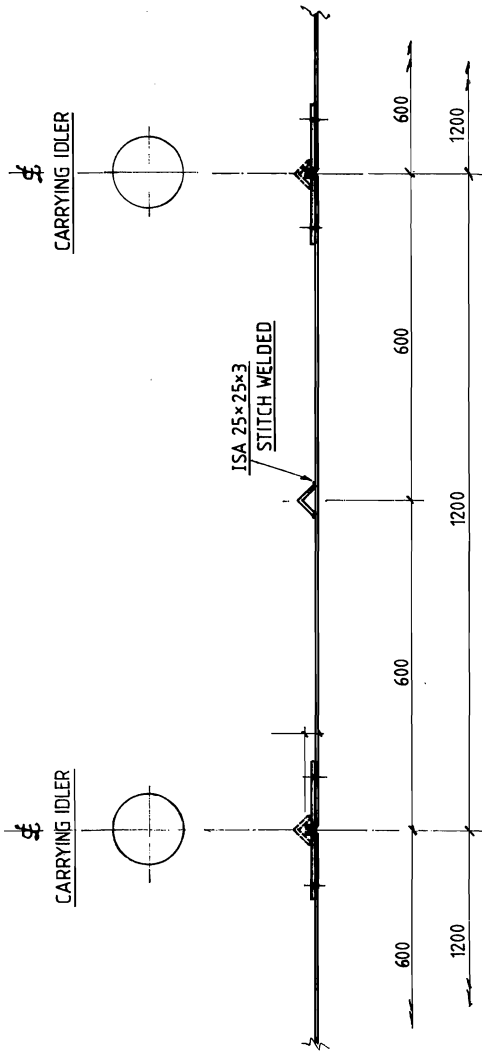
CONVENTIONAL DECKING PLATE BY WELDING AN ANGLE AND BENDING EDGES.
